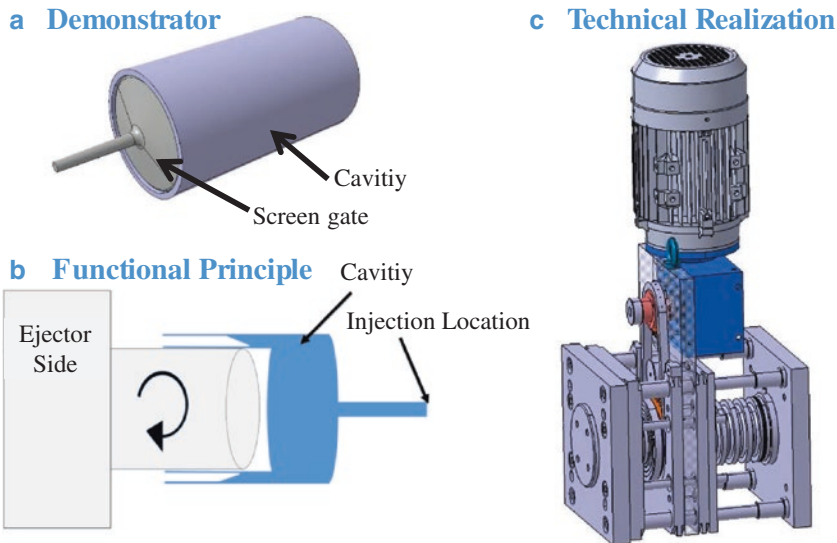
Demonstrator part, functional principle and technical realization of the injection moulding with a rotating core (source: University of Applied Sciences Osnabrück)
